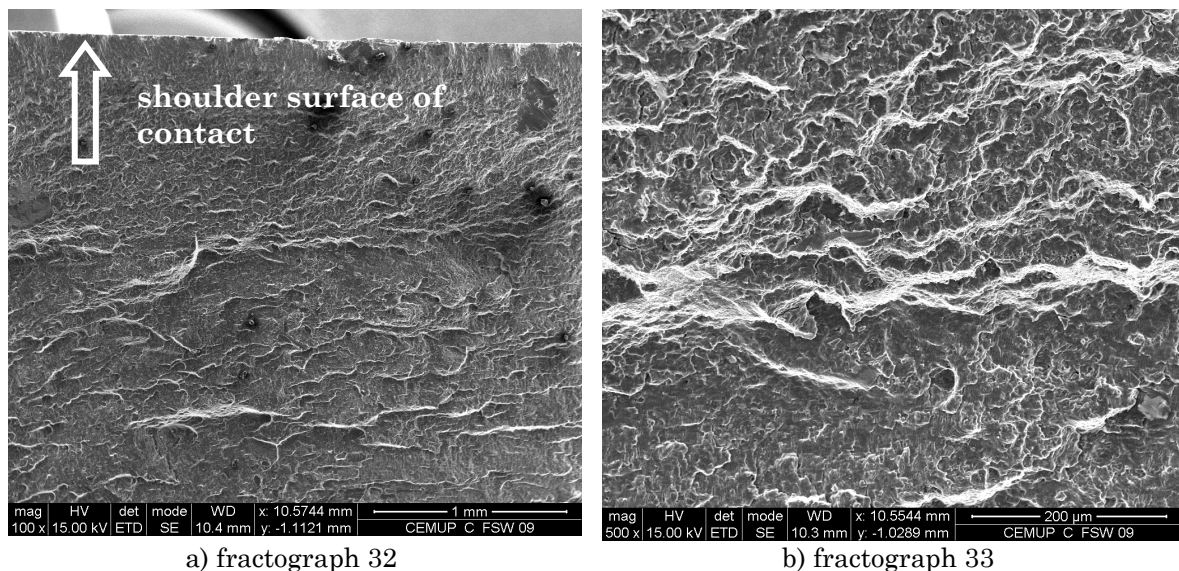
T-joint FSW 6056 PWHT-T6 R=0,1.
